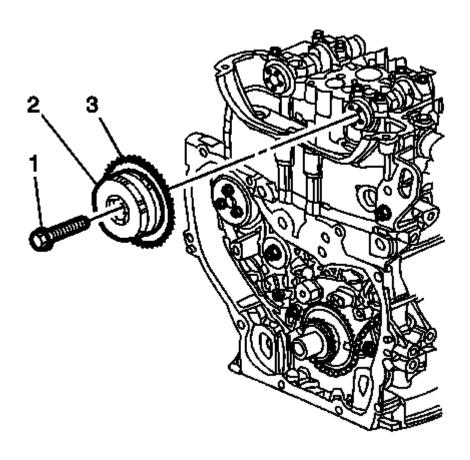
Oil Pump Driven Gear Cam Courtesy of GENERAL MOTORS COMPANY
